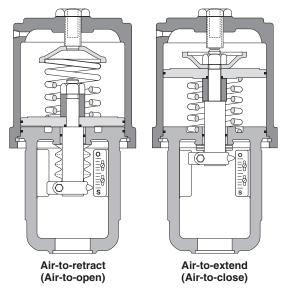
Air-to-retract and air-to-extend configurations for piston cylinder actuators. (*Courtesy of Valtek International*)
